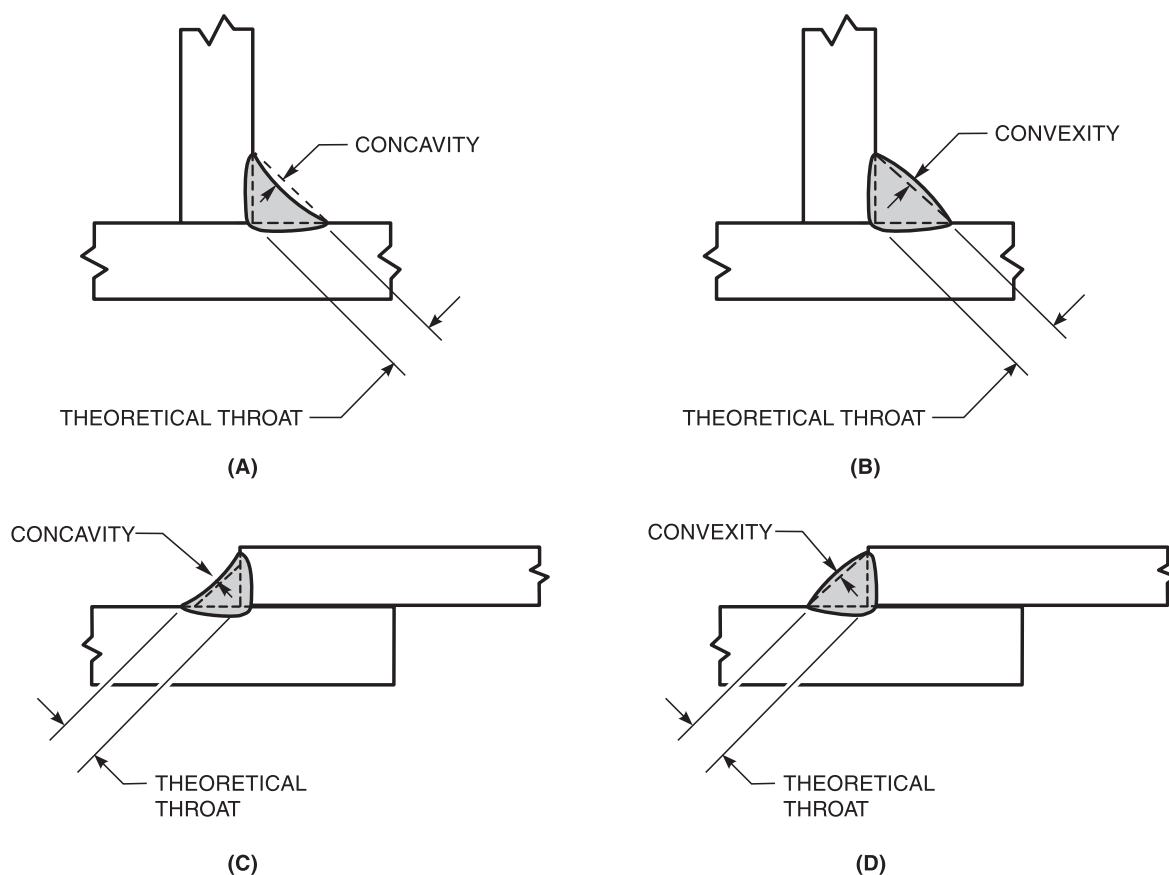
Illustration of Fillet Welds—Concavity and Convexity
